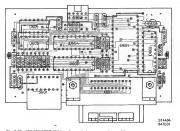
,20. IEC-625/IEEE-488 interface pcb, lay-out, conductor side
